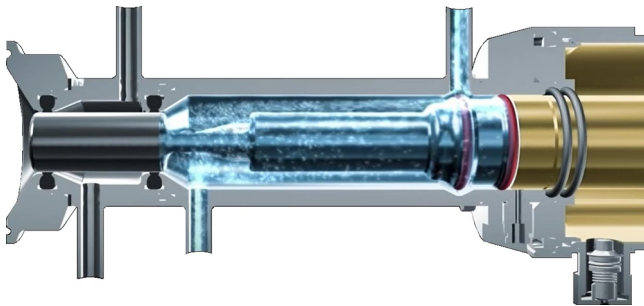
This assembly consists of a dual chamber system, with a front chamber being used as an extra protective barrier to the process. The front chamber is located between two fixed seals and can be cleaned and sterilized. The service chamber is now separated from the pressure cylinder by means of two dynamic seals. The front dynamic seal is cleaned and sterilized together with the service chamber. During the cleaning of the service chamber, it is possible to continuously flush the front chamber (near the surface) with sterile water, and therefore excluding any potential entry of cleaning solution from the service chamber into the process, even when the seal between the front and service chamber is damaged. The front chamber can also be used to isolate the service chamber temperature from the process. After cleaning and sterilization, the sensor guide as well as the two dynamic seals move toward the front chamber. During this action, the sterile front space and the medium remain untouched by unsterilized parts, ruling out the possibility of cross-contamination. *Courtesy of Endress + Hauser AG.
